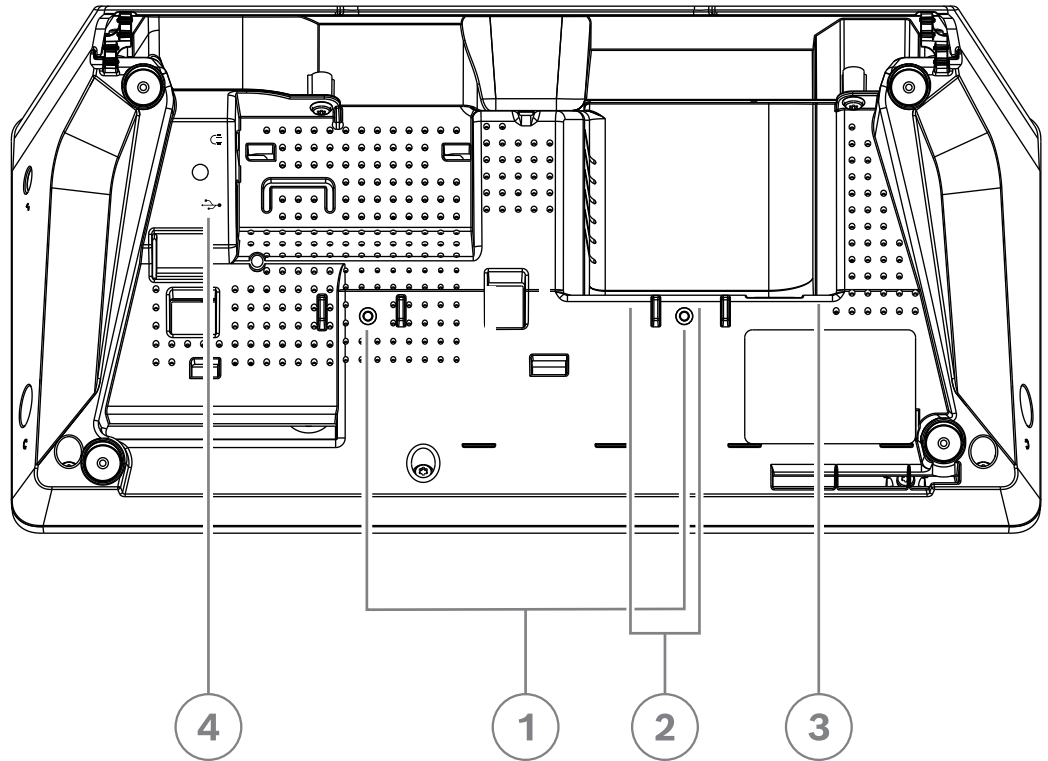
DCNM-IDESK / DCNM-IDESKVID bottom view
